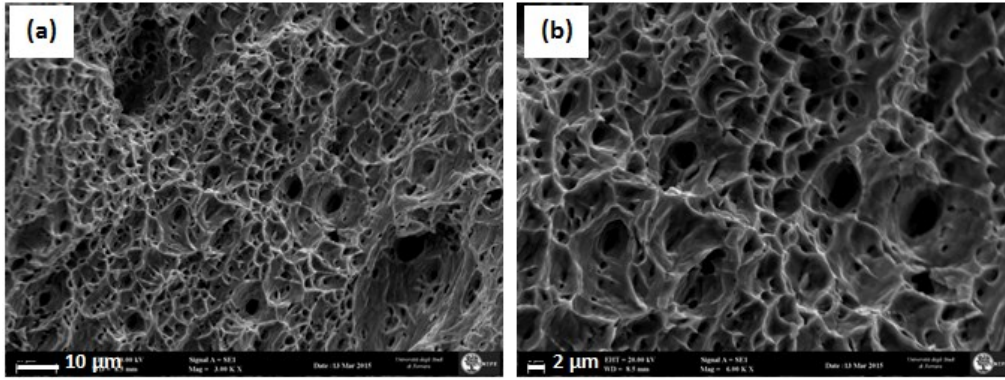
Fracture surface of the base metal (BM)
